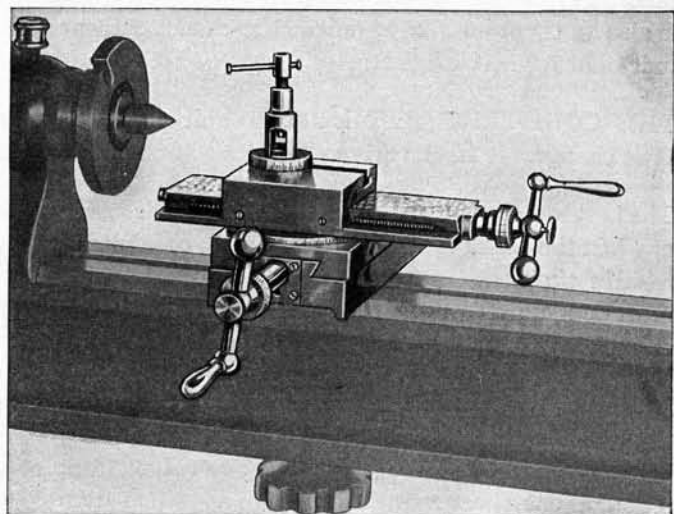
a. Compound Slide Rest with Rocker Tool Post.
